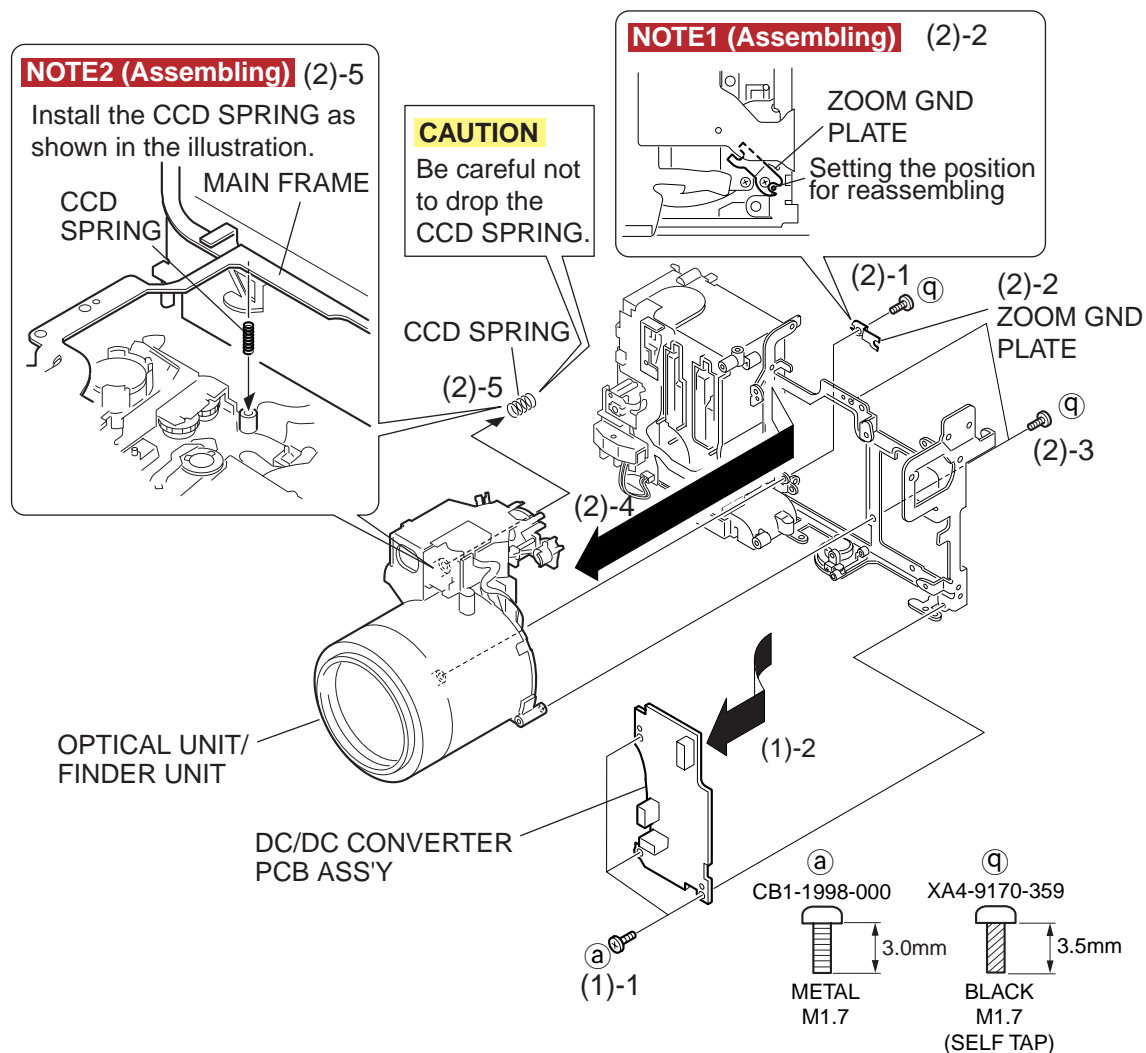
DC/DC CONVERTER PCB ASS'Y, OPTICAL UNIT/FINDER UNIT
